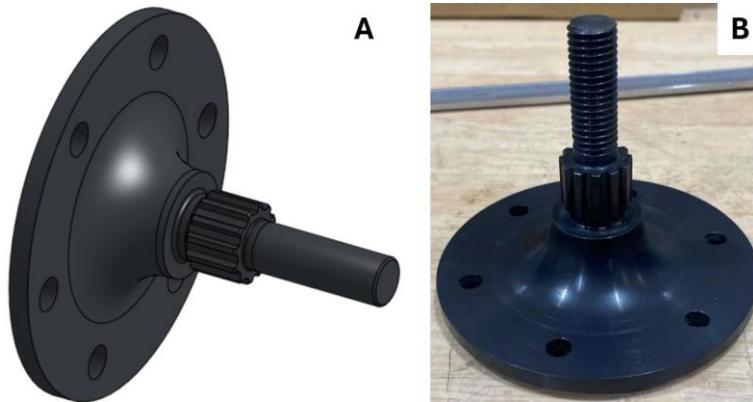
Transmission Shaft. CAD image (A), manufactured (B)
